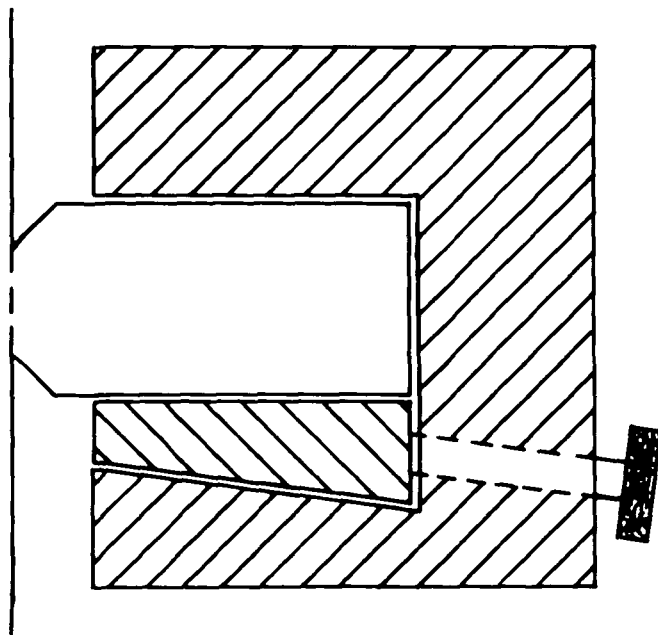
Conceptual Drawing of a Clamping Iosipescu Shear Test Fixture Half.
